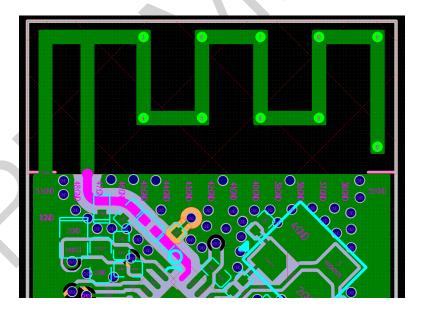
ESP32-H2 RF Layout in a Four-layer PCB Design
